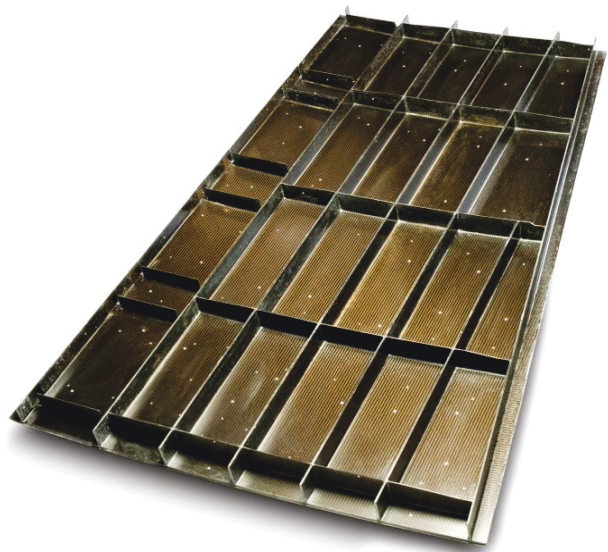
Inside view on the manufactured upper cover with integral stiffeners and caps
